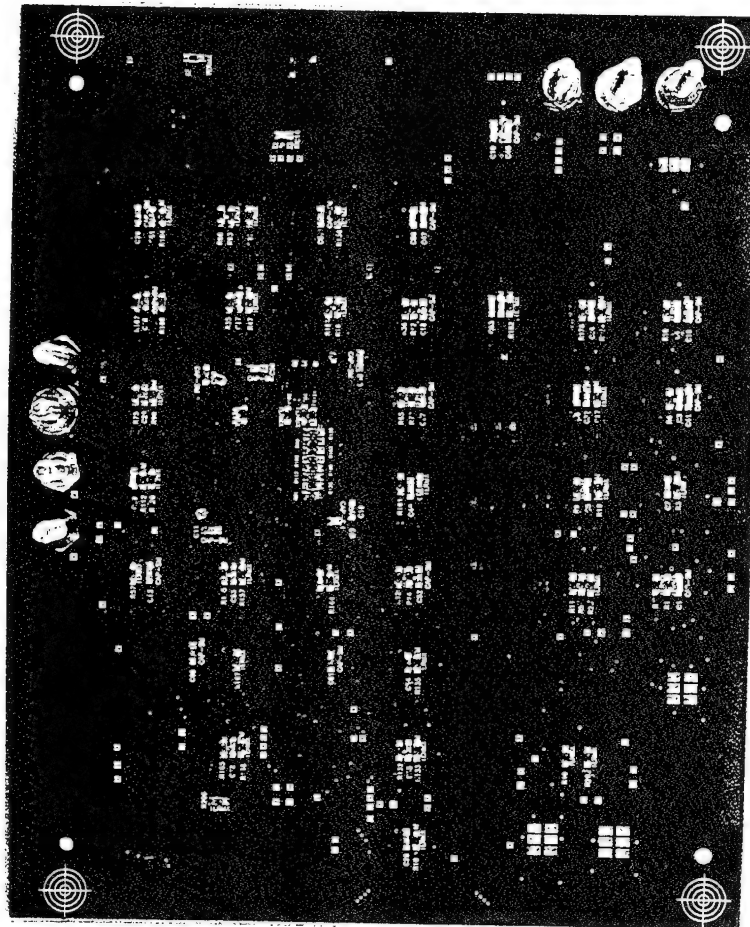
ASSEMBLED PRINTED CIRCUIT BOARD (BOTTOM VIEW)
